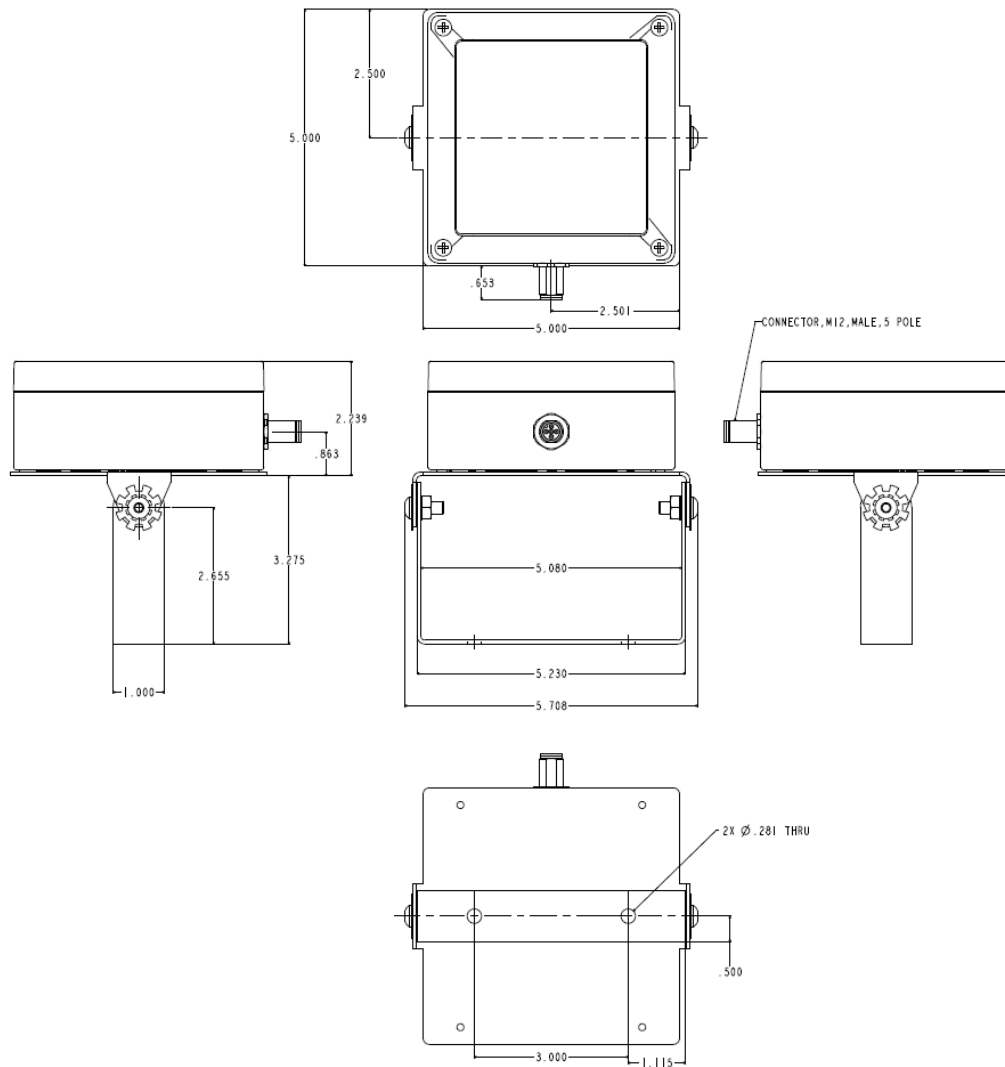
Machine Tool Receiver 33-0111-02 with Mounting Bracket Dimensions
